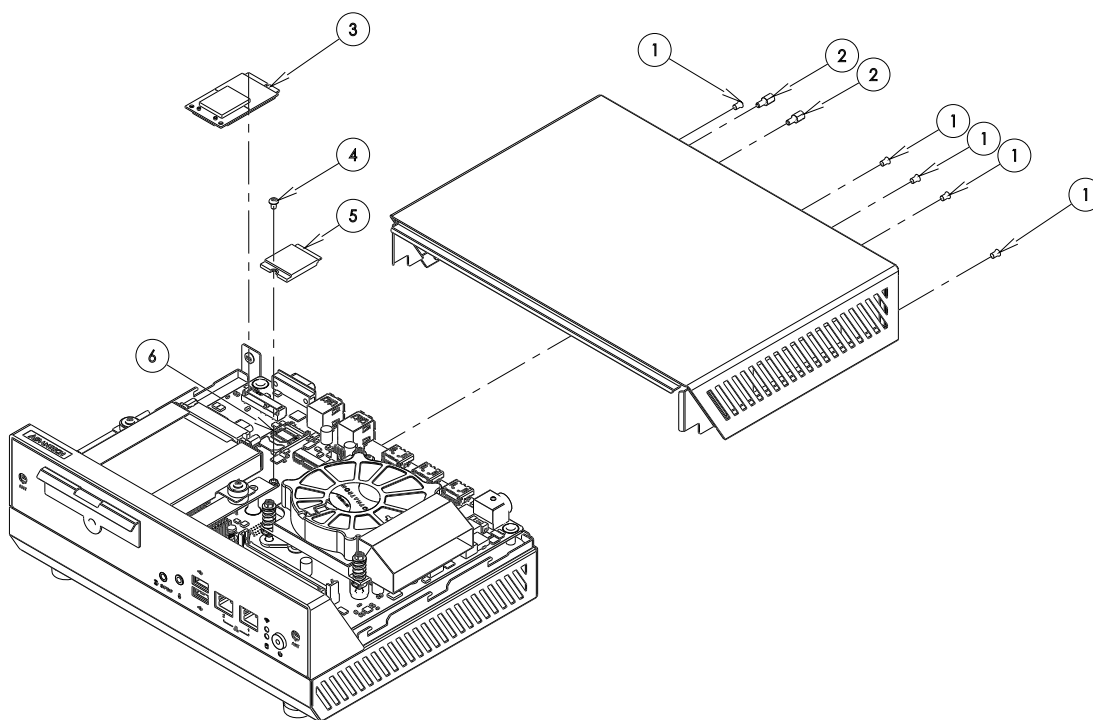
Mini-PCle card/ SIM card/ M.2 WIFI module installation
